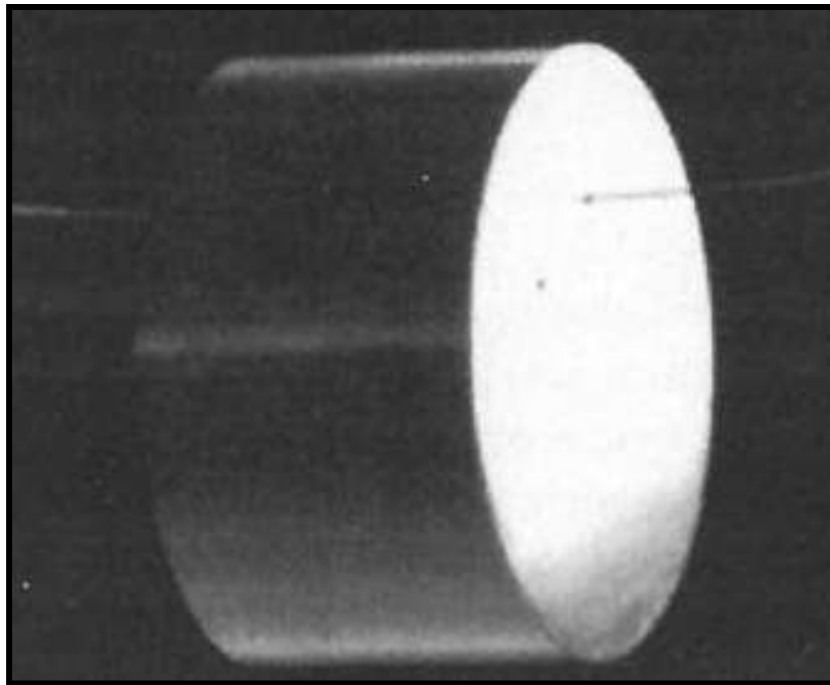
A 0.1 mm diameter hole drilled in 6 mm thick Si<sub>3</sub>N<sub>4</sub> cutting tool insert. Wire passing through the hole is also seen [72].
